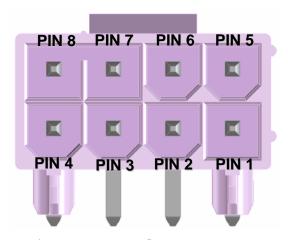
2 x 4 Auxiliary Power Connector Receptacle Side Pin-out
